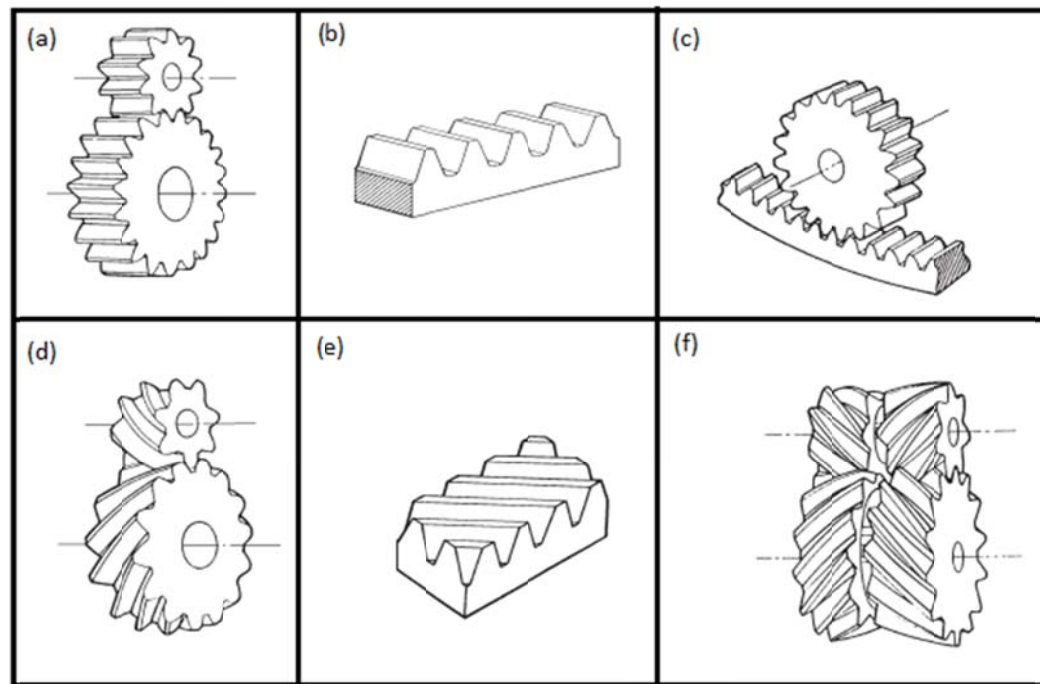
Parallel Axes Gears, (a) Spur Gear ; (b) Spur Rack ; (c) Internal Gear and Spur Gear ; (d) Helical Gear; (e) Helical Rack; (f) Double Helical Gear
